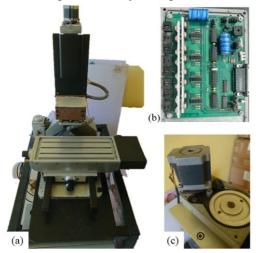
CNC milling machine before improvement; a) 3-axis CNC milling machine frame; b) Controller; c) Z-axis transmission
